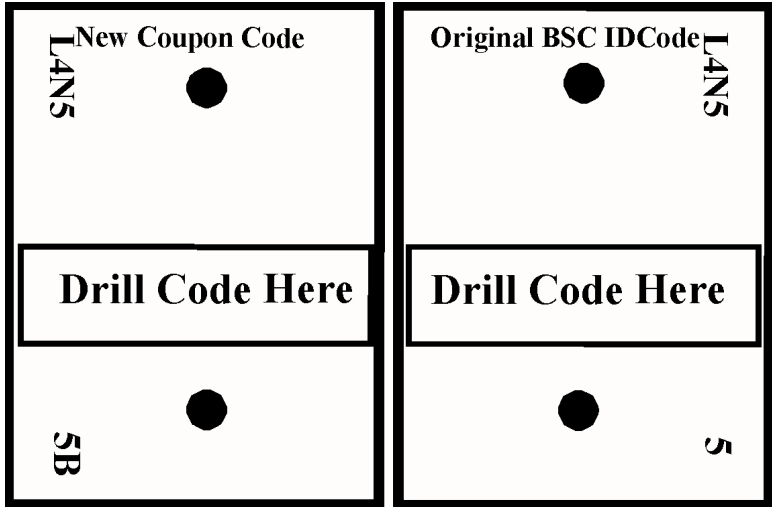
Location of the Coupon Drill Identification Code and two mounting holes.
